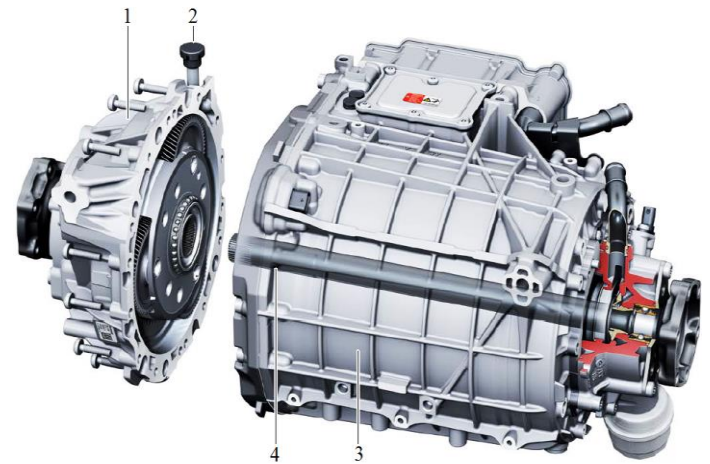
b. Electric motor transmission assembly for the rear drive axle, [50]:
